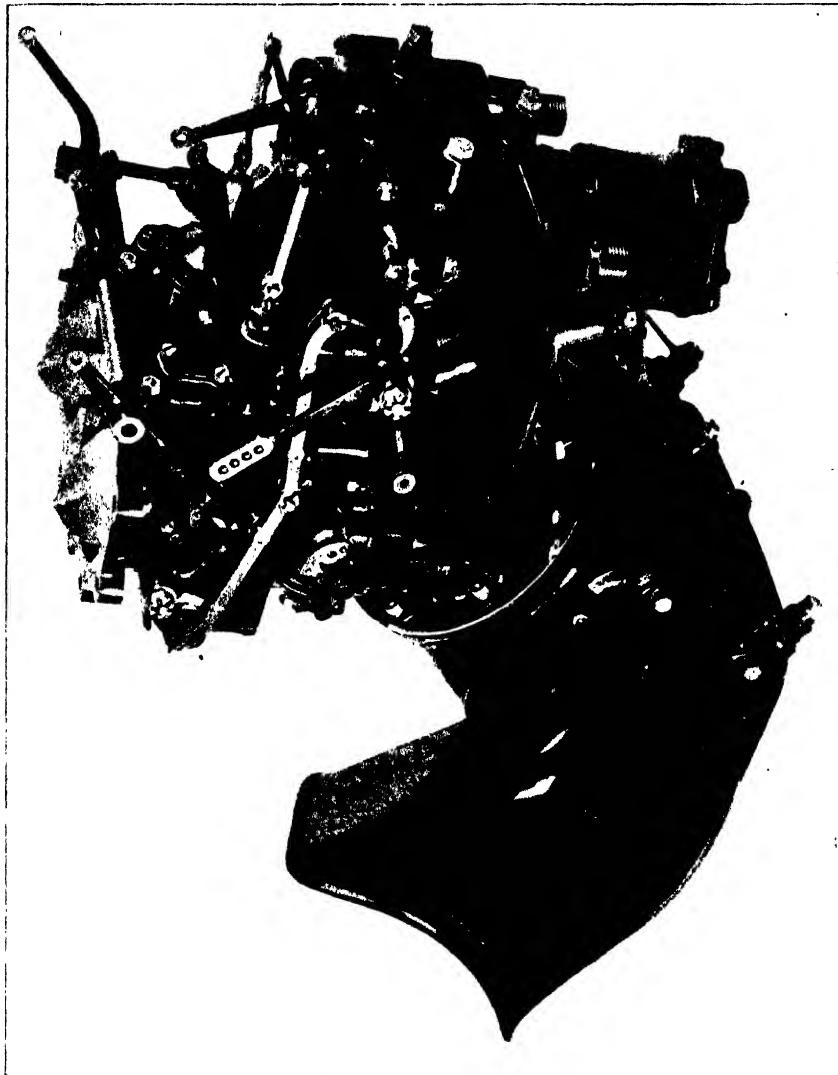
Claudel-Hobson Carburetor, Type A.V.T. 85E.
